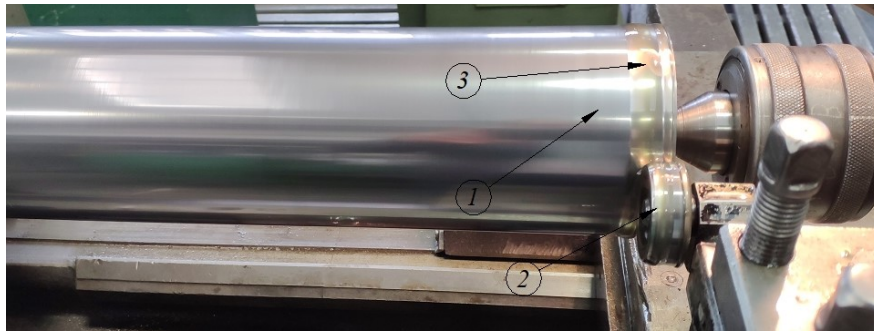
Photograph of burnishing shaft: 1- surface before burnishing, 2- burnishing tool, 3- surface after burnishing.
